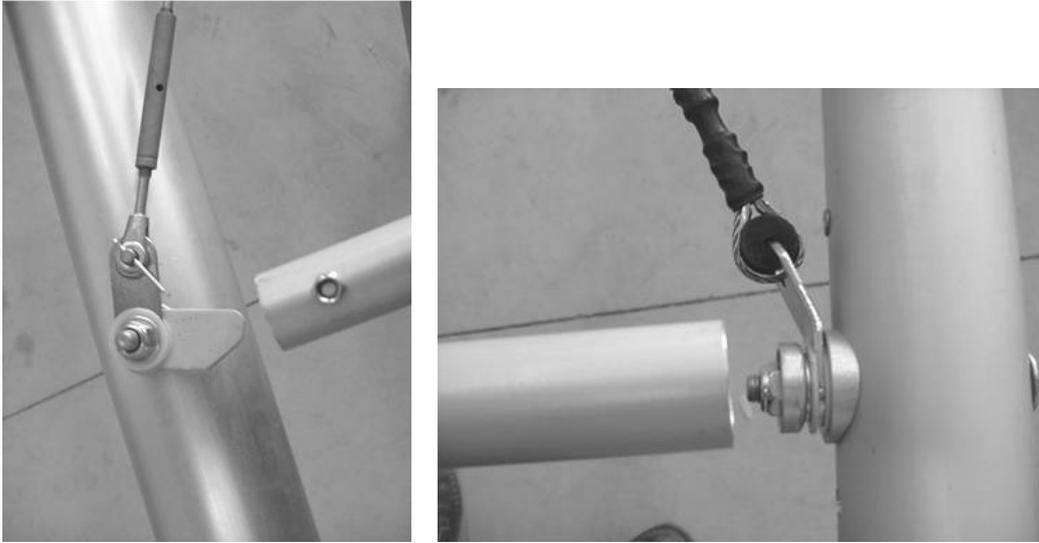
; tensioning tube fittings, front in left photo (note bolt through compression tube), rear in right photo.
